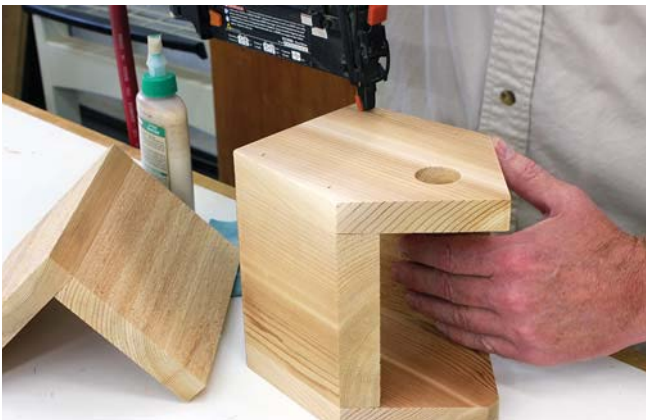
Sandwich the side walls between the house front and back, taking care to line up the wall bevels, then glue and nail the pieces together.
